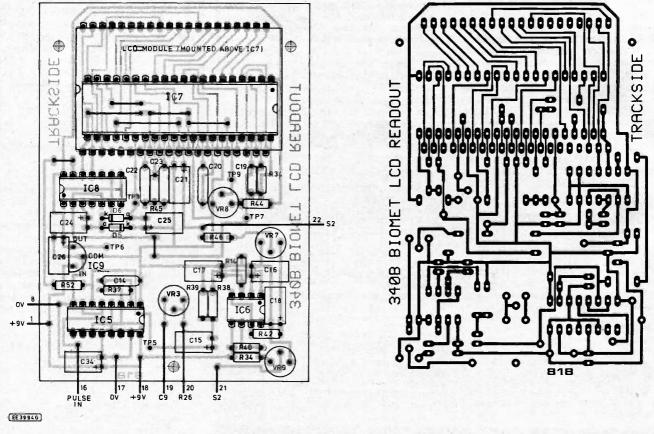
Component layout and full size copper foil master pattern for the Display board. The radial electrolytics and the Philips type polyester capacitors are mounted flat on the board, some covering other components. On the prototype, capacitors C20 and C23 were soldered on the trackside.
